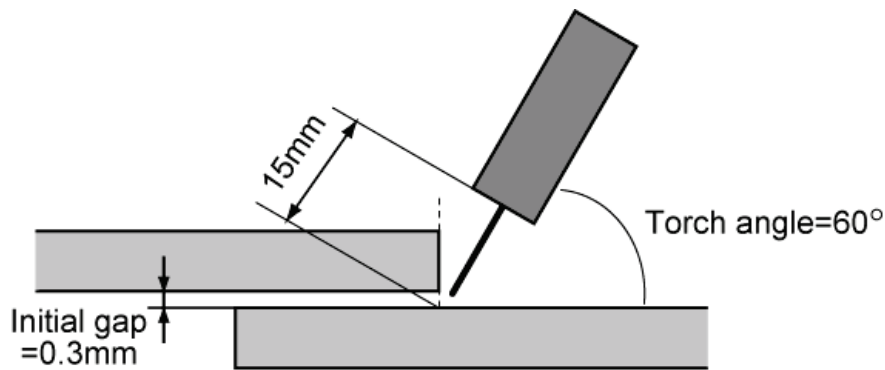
Schematic illustration of experimental set-up of MAG welding (t=2 mm).
